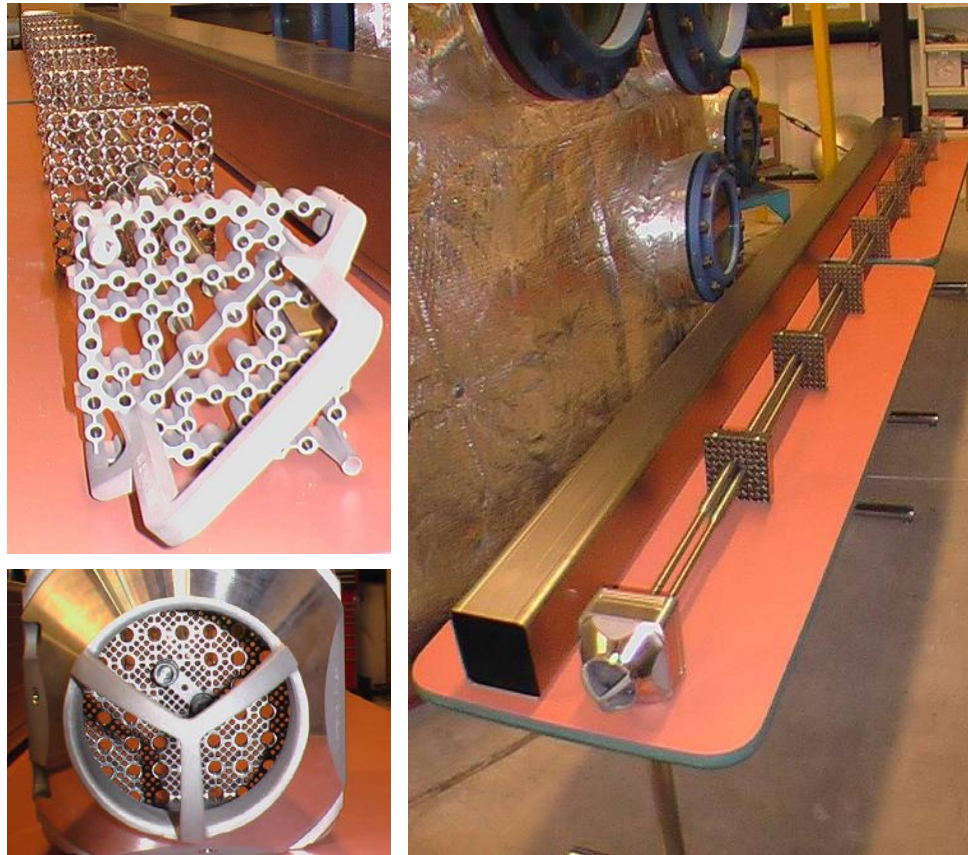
Typical 9×9 BWR components used to construct the test assembly including top tie plate (upper left), bottom tie plate (bottom left) and channel box and spacers assembled onto the water rods (right).
